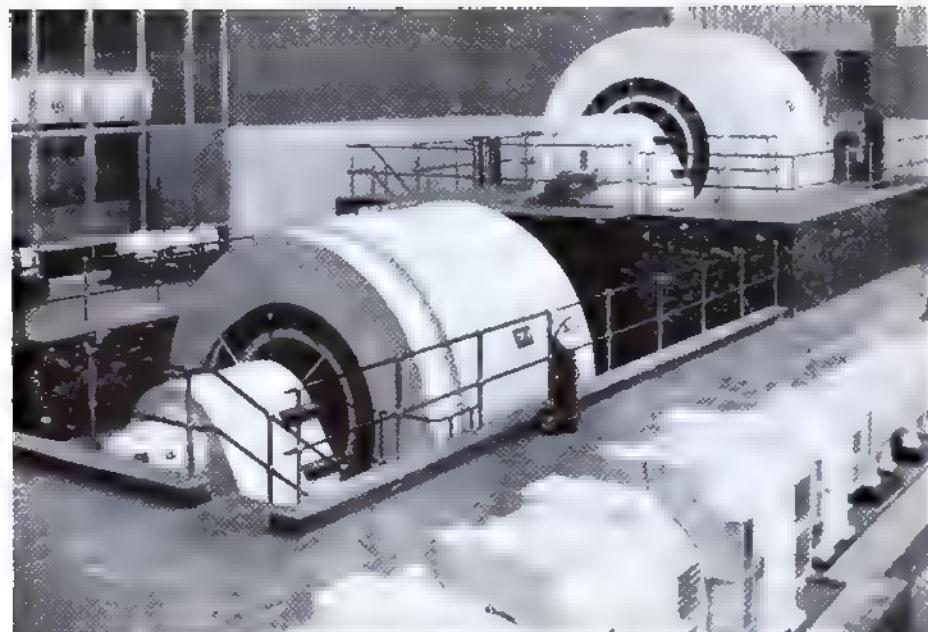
Main motors for the hot reversing mill. The motors are arranged as a "top forward" twin drive, the first in the UK. Each is rated at 4,000 h.p., 30/60 r.p.m., and both are supplied from a single Ward-Leonard-ligner set. Details of the motor layout are shown in Fig. 10. The control room for the motors is seen in the background (left)
